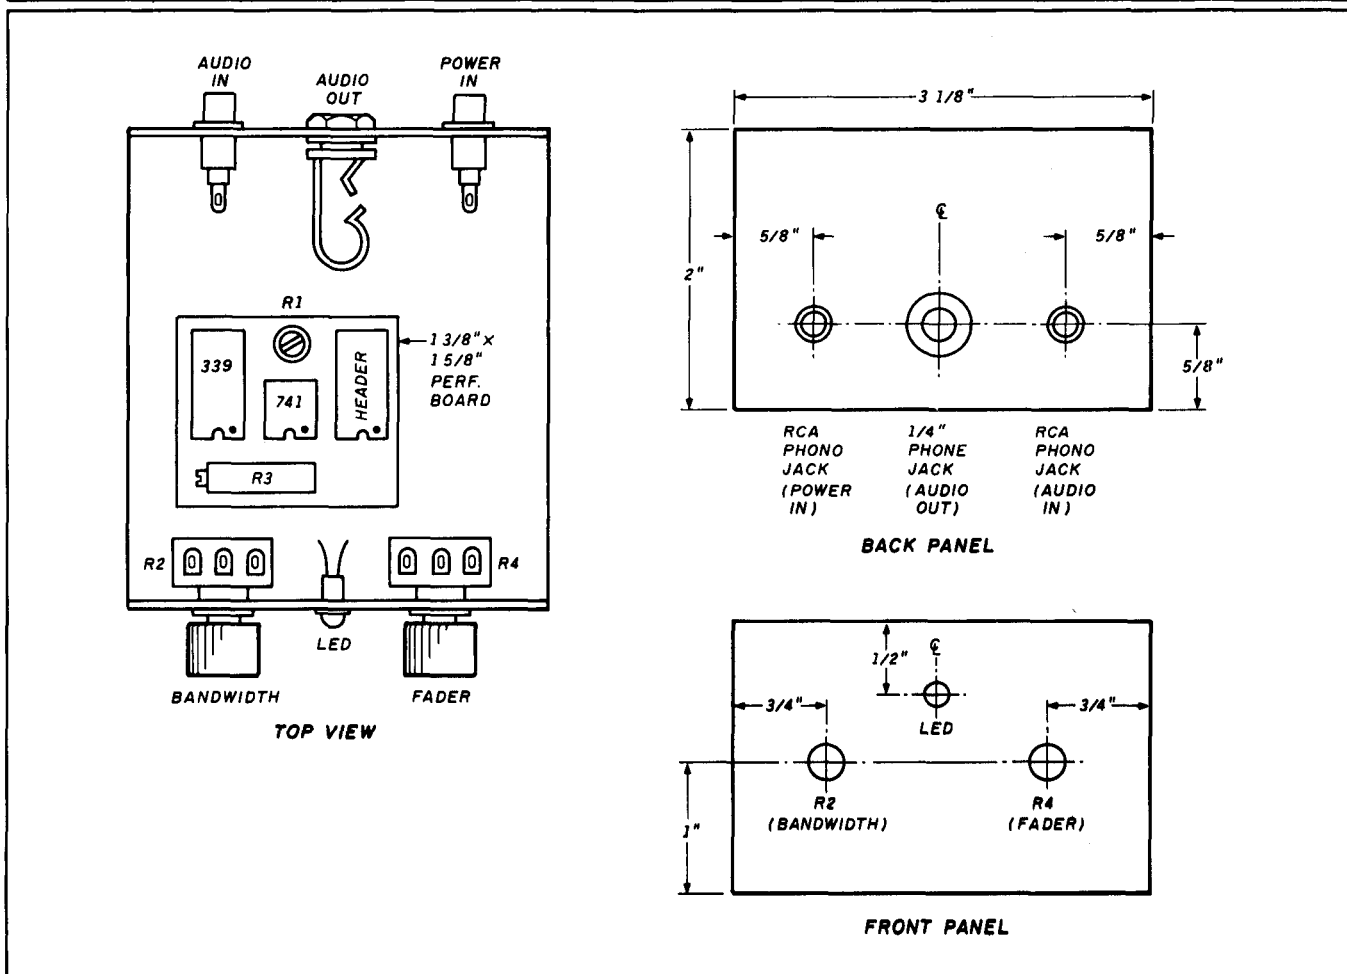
shows the suggested arrangement of a 1-3/8 \times 1-5/8 inch piece of perfboard, along with the parts layout on the front and rear panels. This layout is for use in a 3-1/4 inch wide \times 2-inch high \times 4-inch deep metal cabinet, like Radio Shack's catalog no. 270-251. The layout in Figure 4 requires an external source of power. Take power from existing equipment or use a small wall-mounted power pack.
